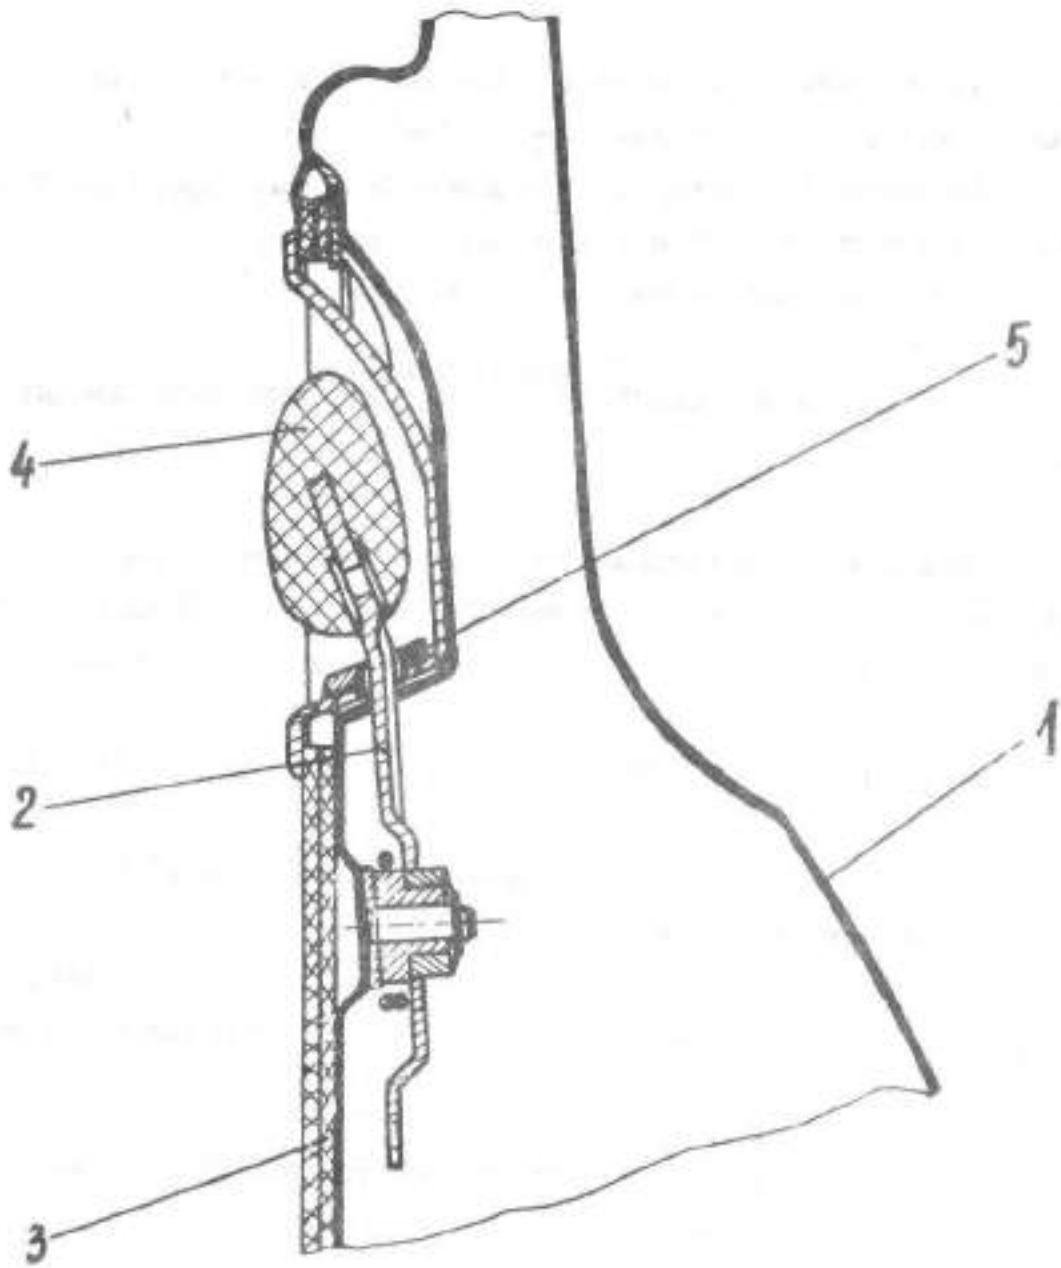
INNER FRONT DOOR LOCKING HANDLE
